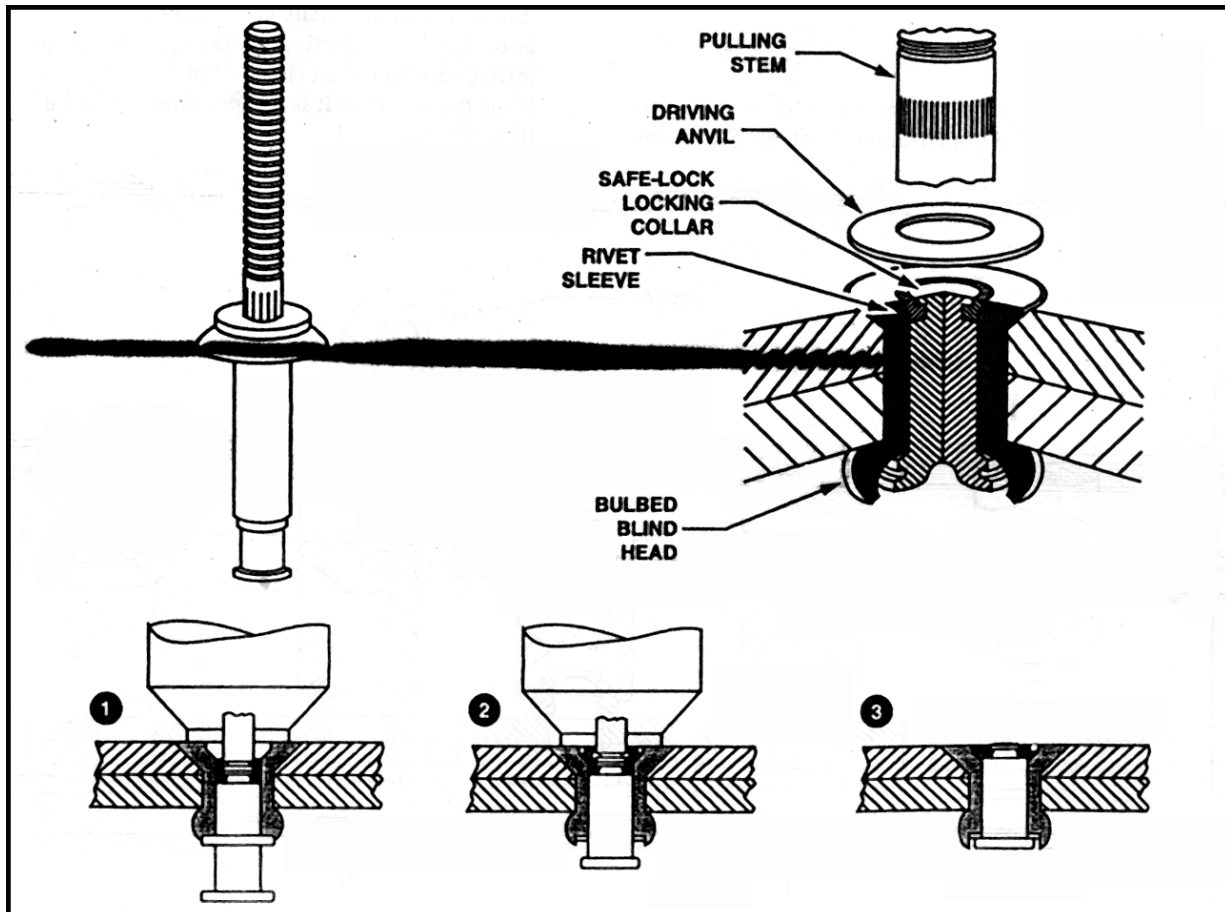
, (1) - As the stem pulls into the rivet sleeve it forms a large bulb that seats the rivet head and clamps the two sheets tightly together. (2) - As the blind head is completed, the safe-locking collar moves into the rivet sleeve recess. (3) - as the stem continues to be pulled, the safe-lock collar is formed into the head recess by the driving anvil, locking the stem and sleeve securely together. Further pulling features the stem, providing a flush, burr-free installation.
